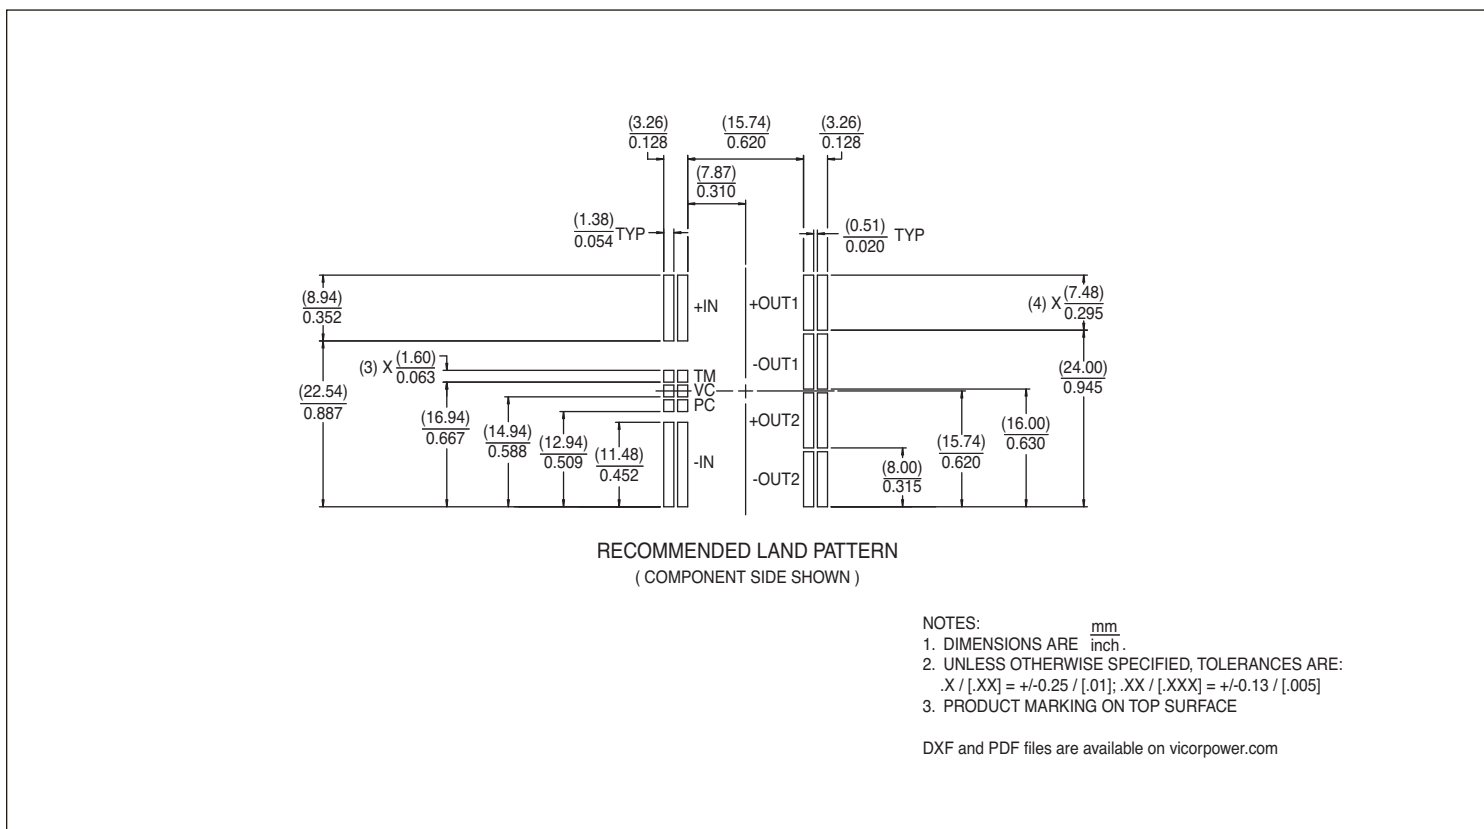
VTM J-Lead PCB land layout information; Onboard mounting
